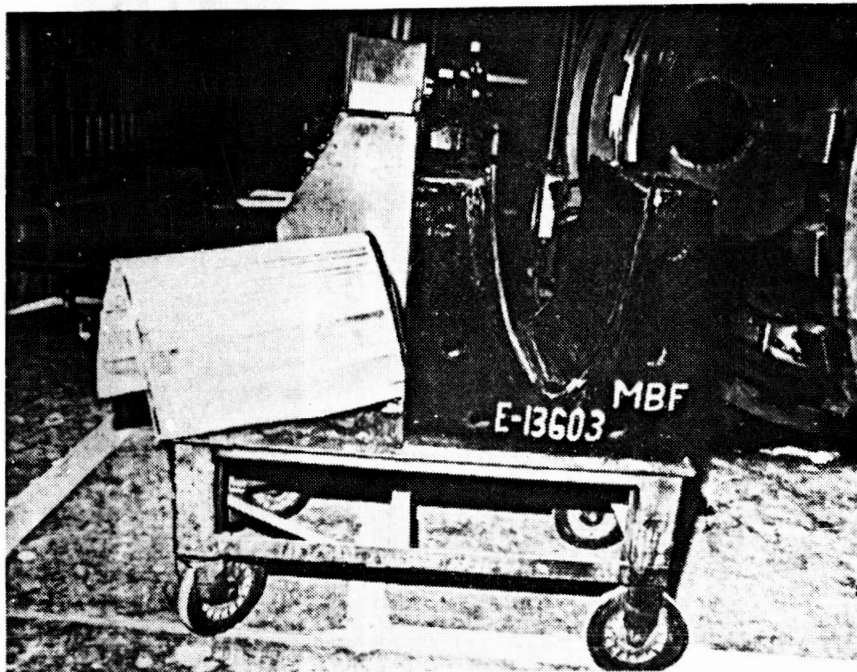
Leading Edge Substructure and Mold. Peel Ply Partly Removed
